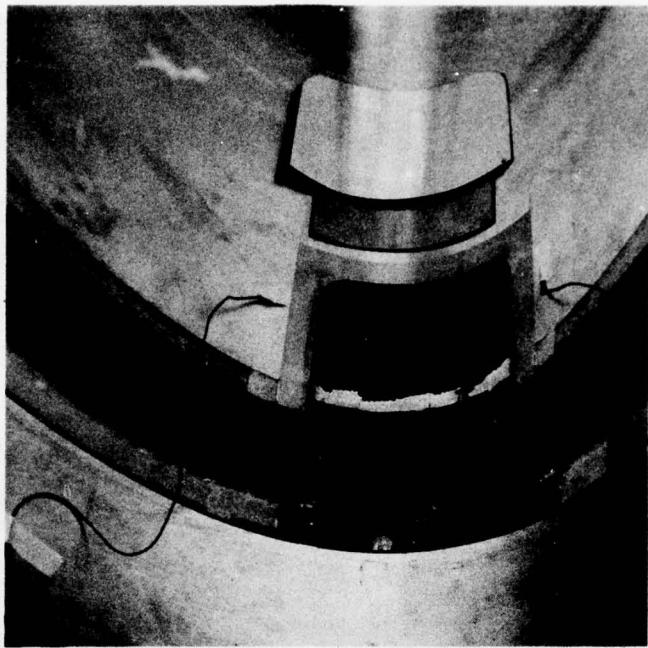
Repaired C-141 Wing Leading Edge Ready for the First-Stage Cure
